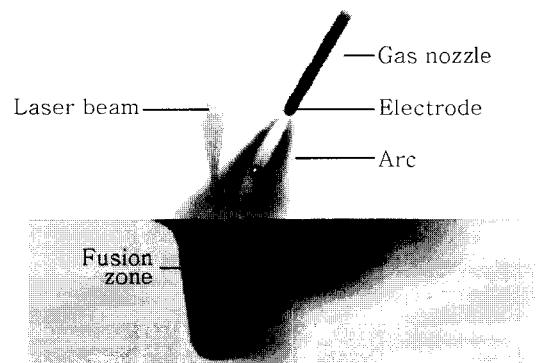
Schematic representation of Laser Hybrid welding
